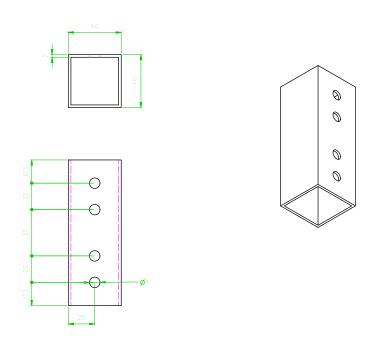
Sliding valve 2 inlet and outlet chamber.
